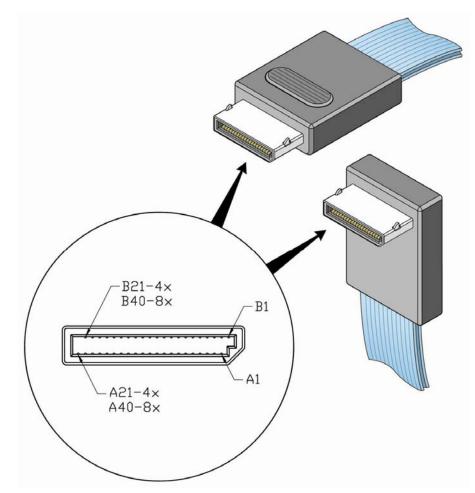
CONTACT NUMBER LOCATIONS FOR FREE CABLE ASSEMBLIES
